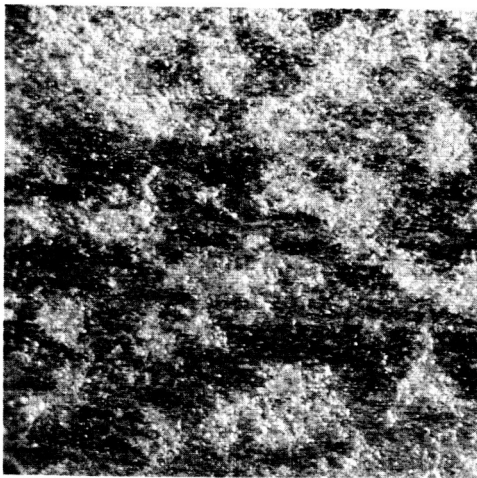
Disk Surfaces After 100 Hrs. Test
